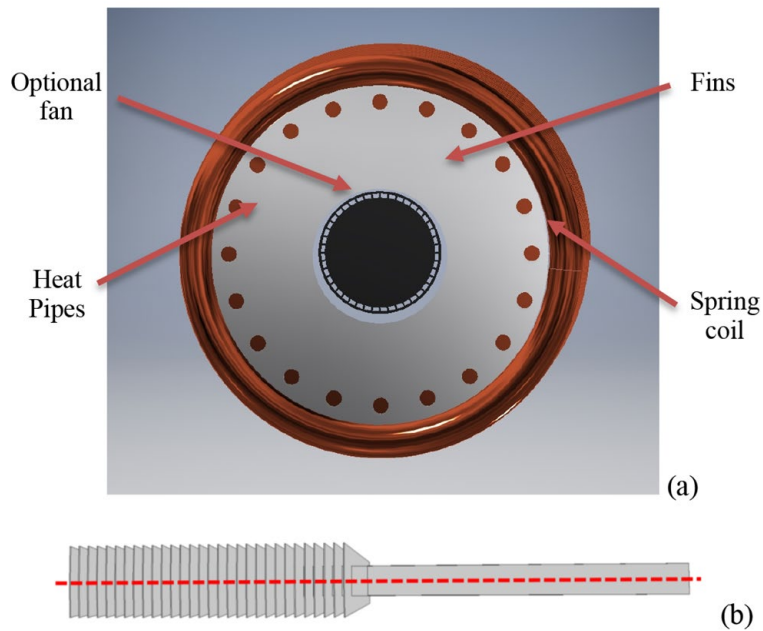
Hybrid cooling concept with heat pipes– (a) end view of system with heat pipe tips in contact with final circular fins; and (b) one heat pipe with plain finned heat sink assembly.
